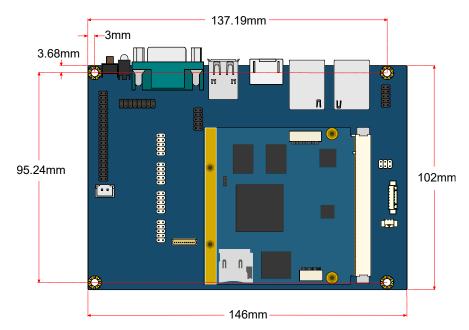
Dimensions of the VIA QSM-8Q60 attached to the carrier board (top view)
